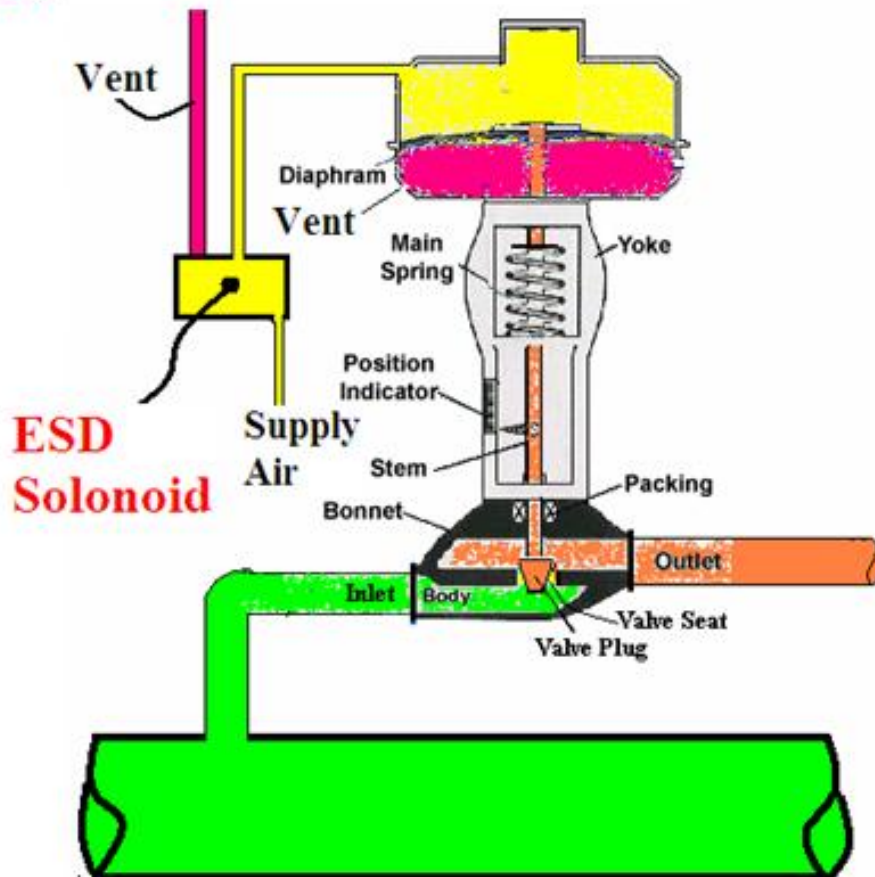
Conceptual image of a “fail open” control valve. Notice that as the air supply to the valve is removed the spring pushes the valve stem upward. As the valve stem rises, the valve opens.
